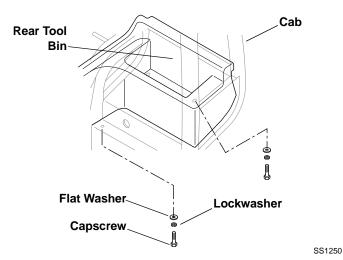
Install the three hex-head capscrews, lockwashers and flat washers securing the rear tool bin to the cab.
